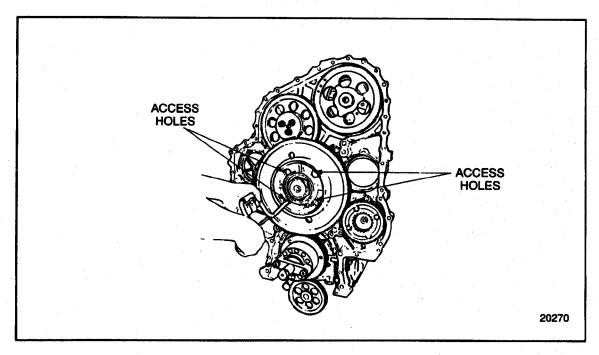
Removing Bull Gear Assembly Retaining Bolts
